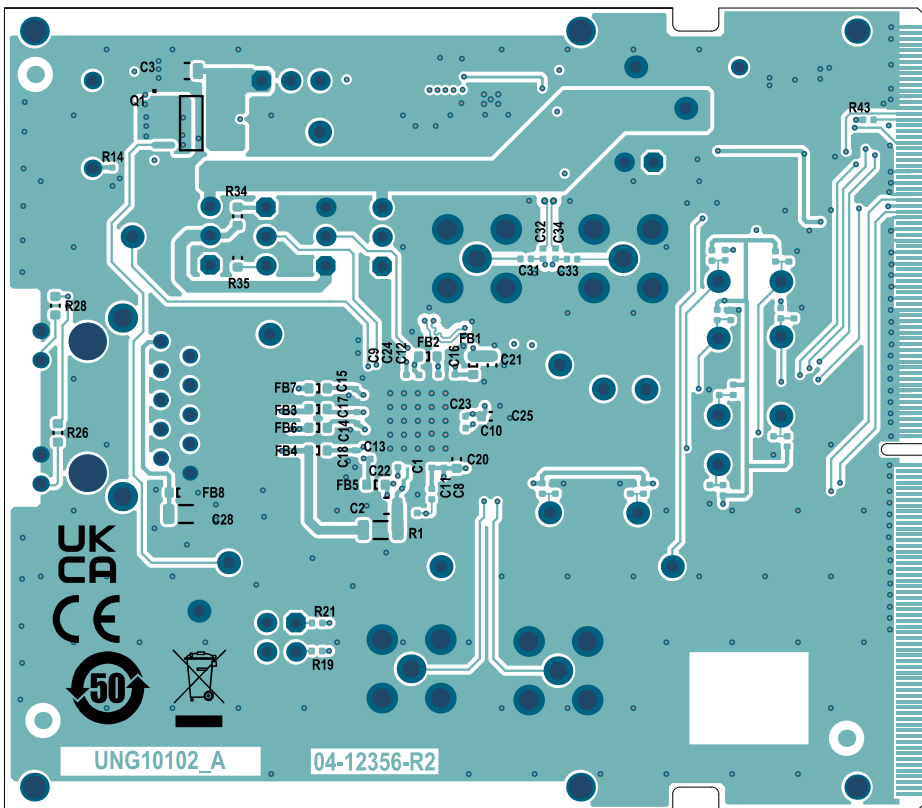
LAN8842 EDS2 DAUGHTER CARD BOTTOM SILK
